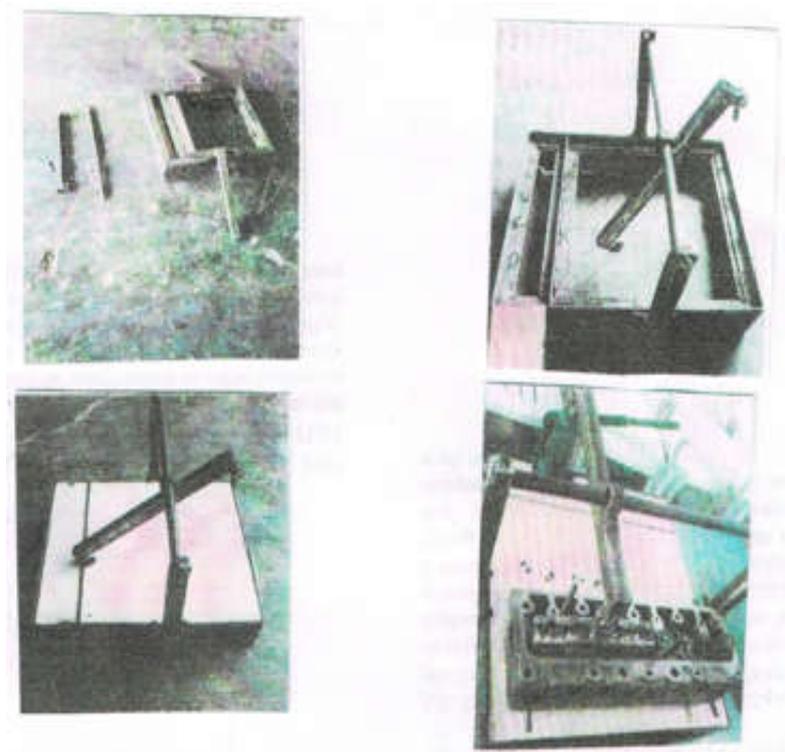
Shows the assembly phase of Collapsible Valve Spring Compressor
